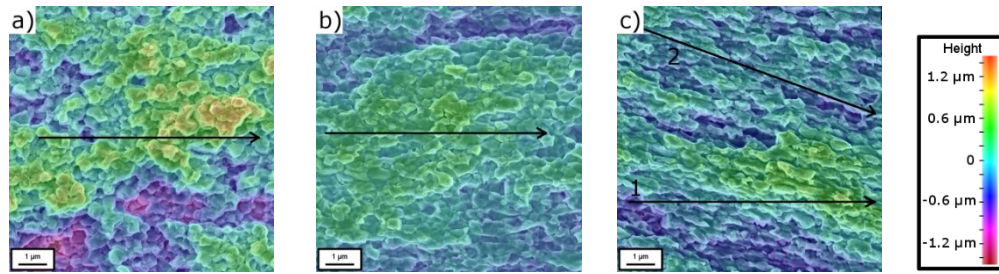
Fractographs of (a) RD, (b) TD and (c) TD-B samples after 1500µm crack propagation. Colors show the height of the surface determined by a stereophotogrammetric technique. Paths of height measurements of the fracture surface shown in Fig. A-5 are marked by black arrows. Crack propagated from left to right.
